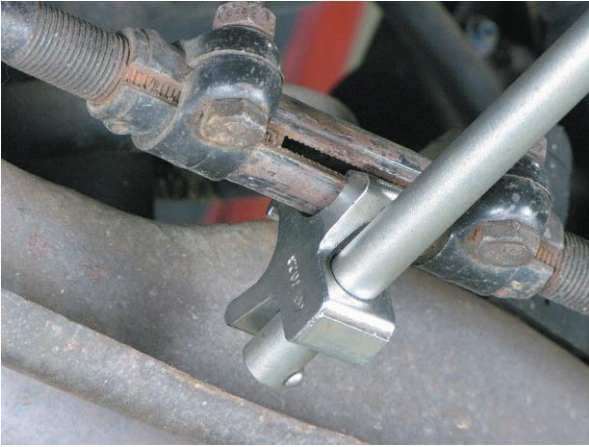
A special tie rod adjusting tool is used to rotate the tie rod adjusting sleeves.
